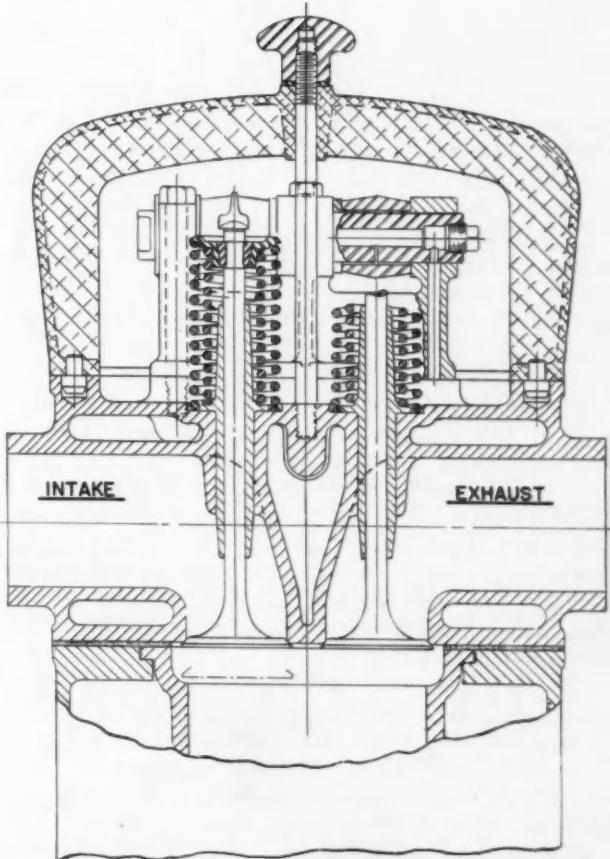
Section of Cylinder C Showing Details of Sleeve Construction
